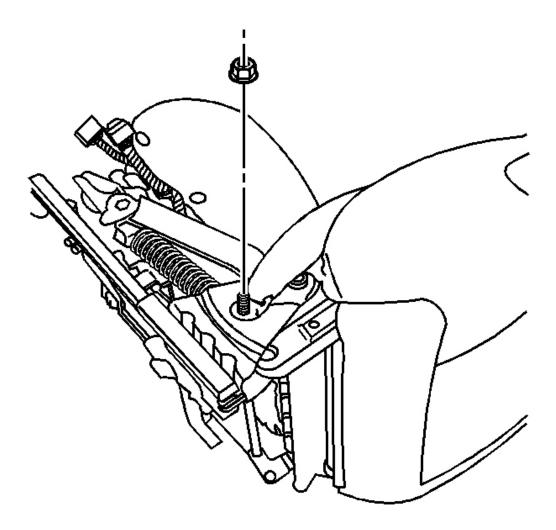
Identifying Seat Belt Anchor Nut Courtesy of GENERAL MOTORS CORP.
